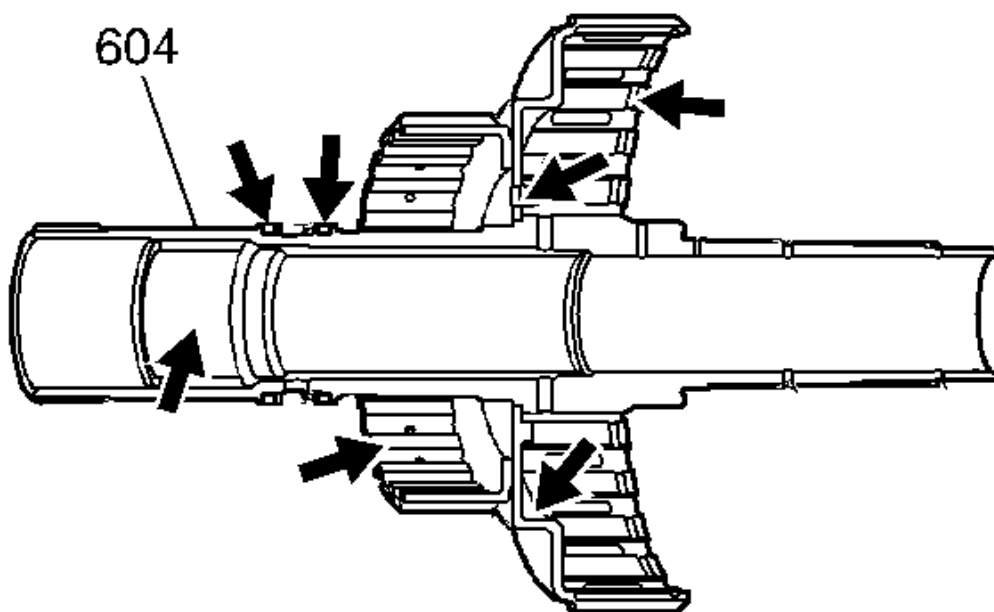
Identifying 3rd Clutch Housing Inspection Points
